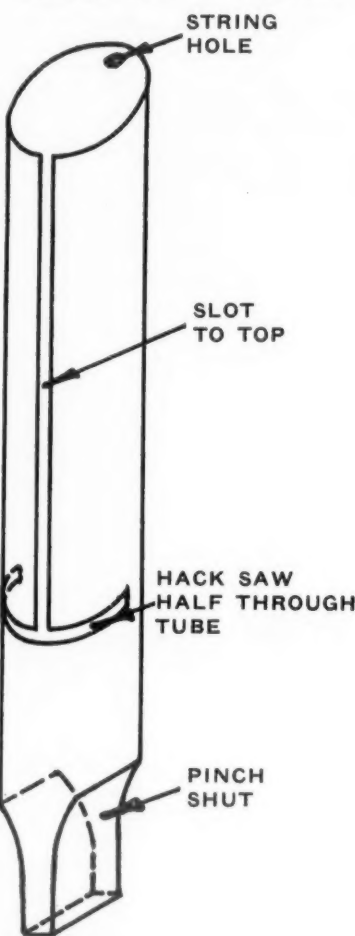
Drawing showing construction of tubing-holder for a brine thermometer.
